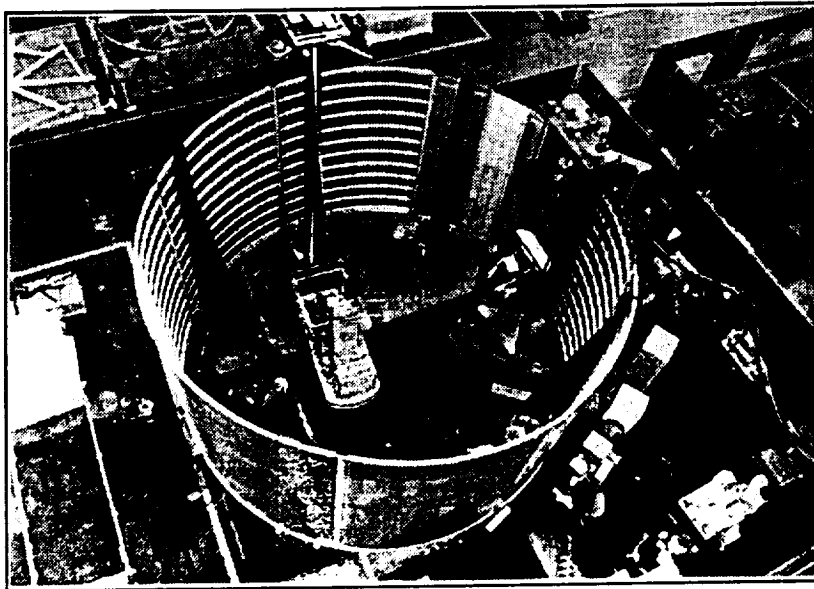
Full Scale Friction Stir Welded Barrel Demonstration.
